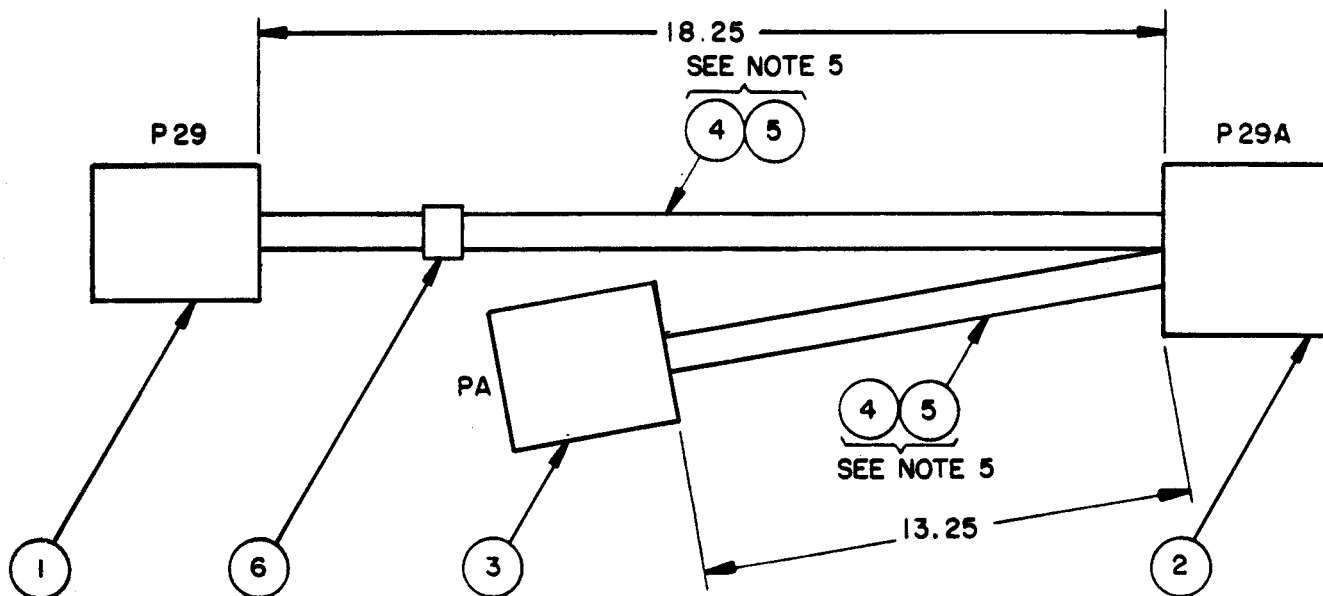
Fabrication of Special Relay Assembly to Remote Functions Box Assembly Wiring Harness (Sheet 1 of 2)
